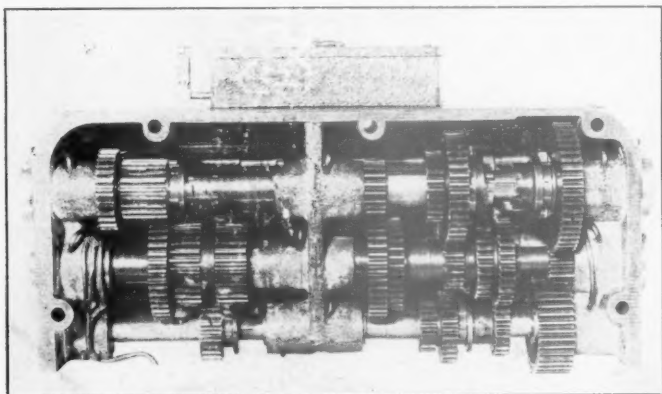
A Part of the Sliding Transmission That Remains In the Removable Part of the Gear Box
